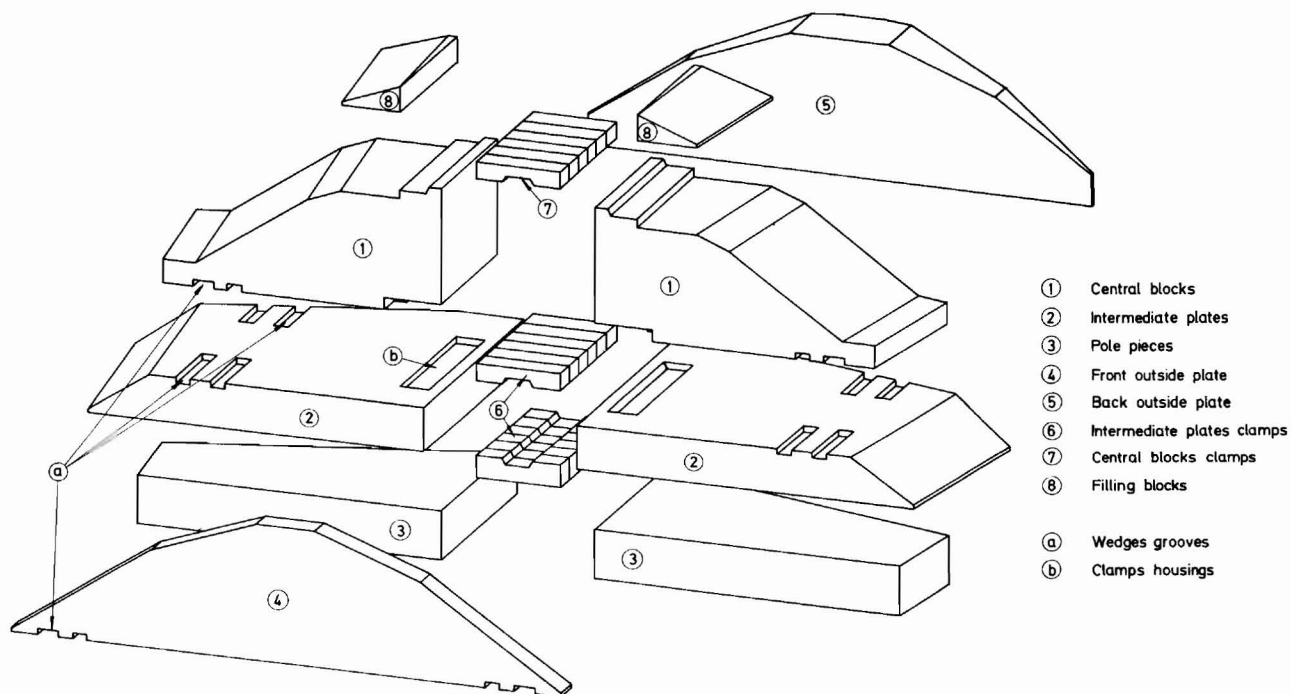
Exploded view of the main components of the SFM upper yoke.
